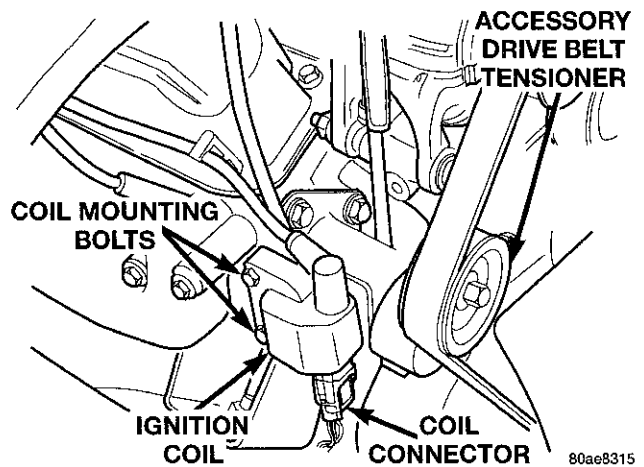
Ignition Coil—3.9L/5.2L/5.9L Engines—Typical (5.2L Shown)
